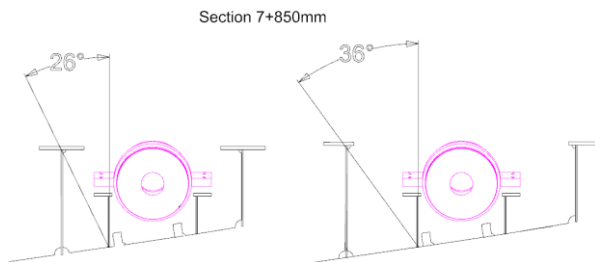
Maximum welding angle between keelsons on section 7+850 mm. Original structure (left) and proposed modification (right)
